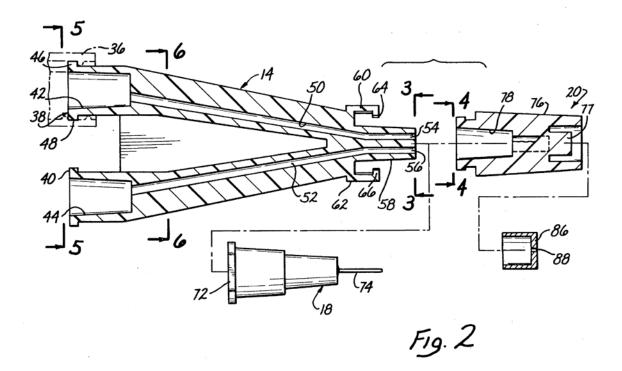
is an enlarged cross-sectional, exploded view of manifold 14, spray assembly 20 having spray nozzle 86, and alternative needle assembly 18. Ex. 1011, 3:63–64, 4:19–23, 5:38–40. As seen above, cylindrical extension 77 of spray assembly 20 has the same cross-hatching as the remainder of body 76 of spray assembly 20. Rather than showing a separate piece inserted within the body of the spray assembly, Capozzi discloses a one-
